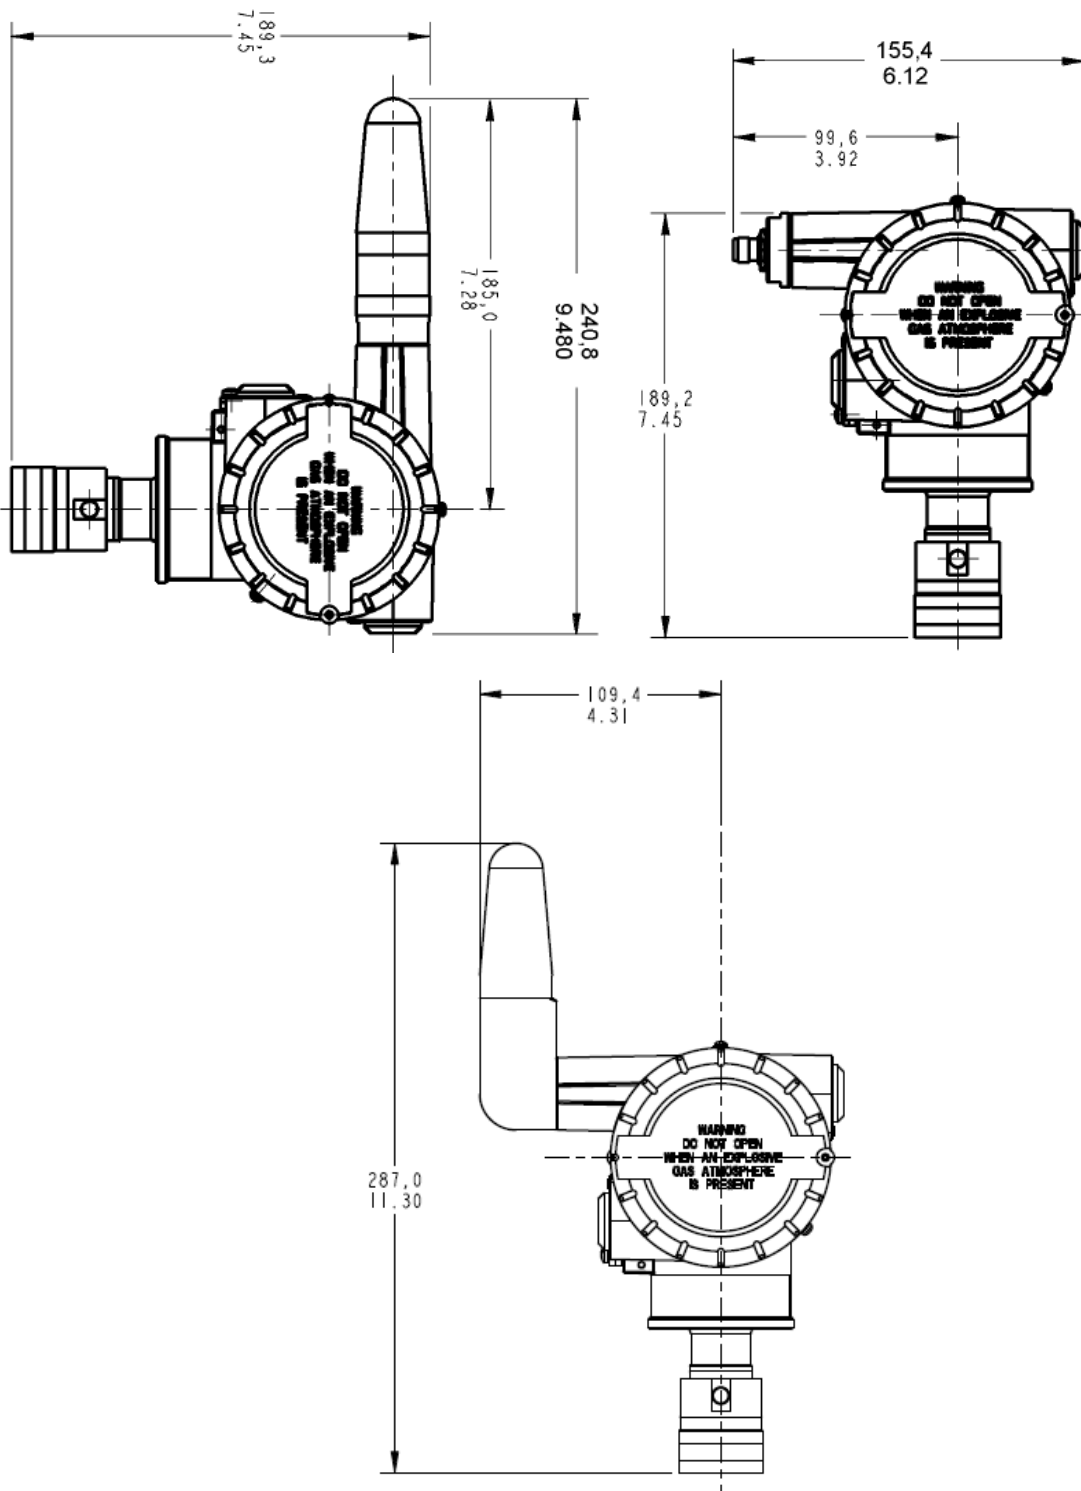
Typical mounting dimensions for in-line models (rear view)
